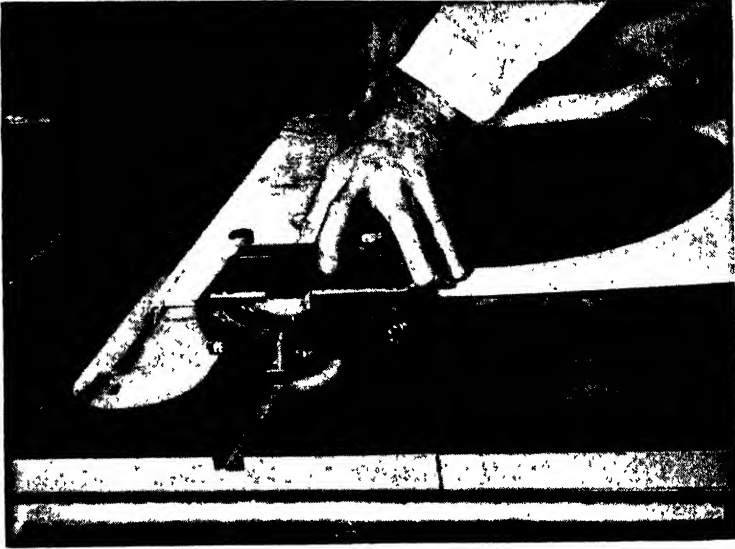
An extra wide board may be sawed by reversing the miter gage and keeping the board firmly against the miter gage as it is advanced over the saw table.
